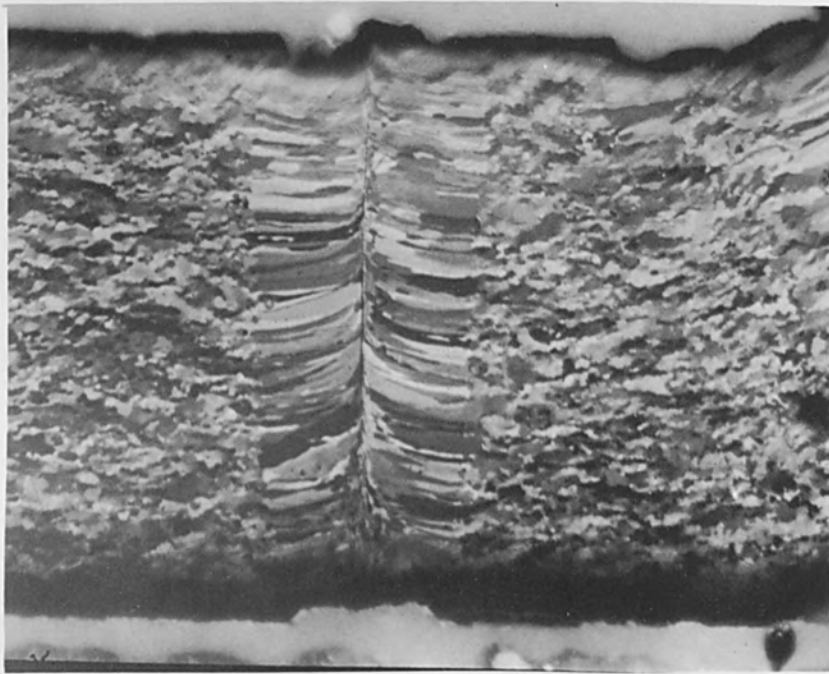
Weld Cross-section in 0.040-in. Beryllium
